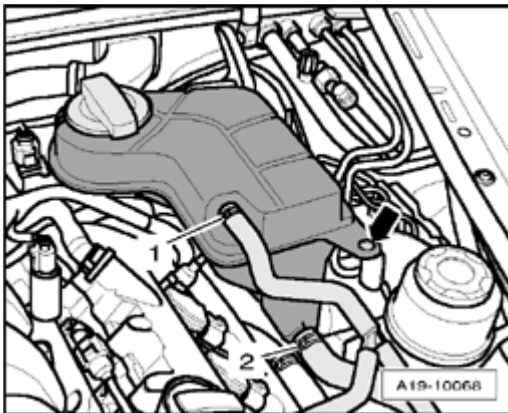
Removing Coolant Hoses At Coolant Expansion Tank
